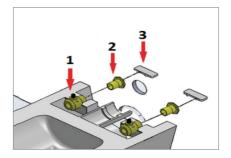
Tighten parts no:1 and no:2 that are placed in the installation holes by using the wrench
